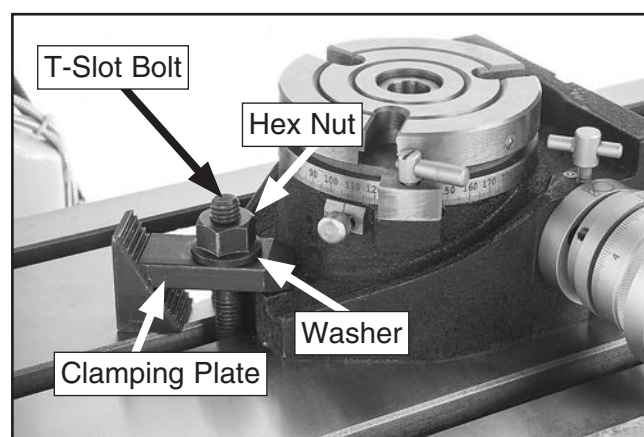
Rotary table mounted using T-slot bolt assemblies.
